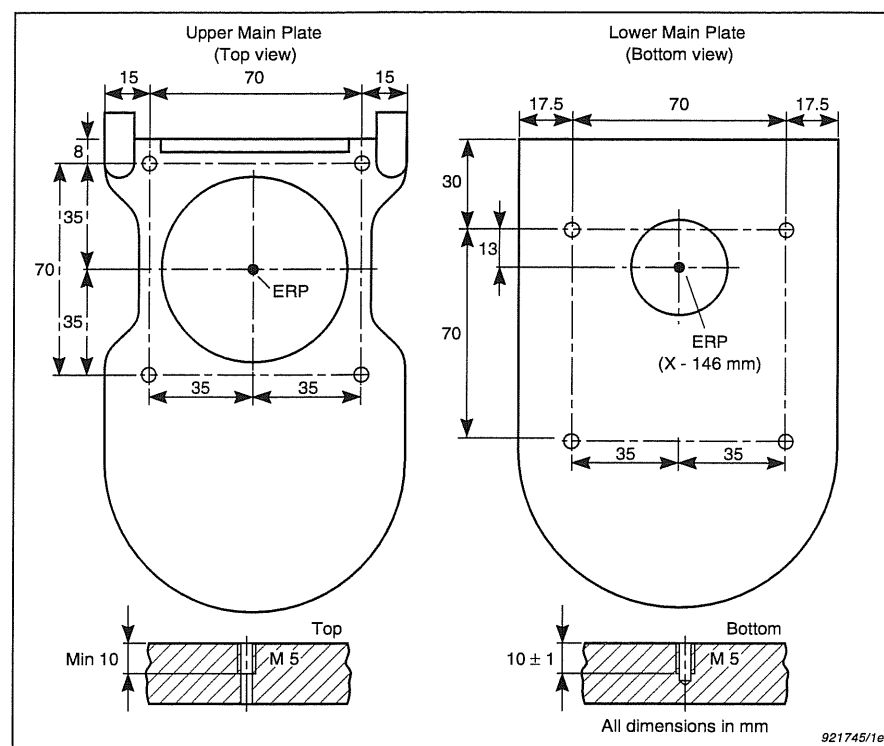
Position of M5 threads for mounting a custom-built jig (upper main plate) and for mounting the Test Head in a QC (quality control) set-up (lower main plate)
